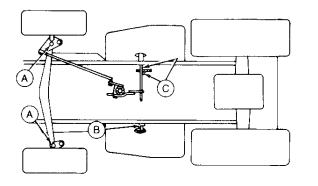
Grease Fitting Locations (Serial No. 95,001-
